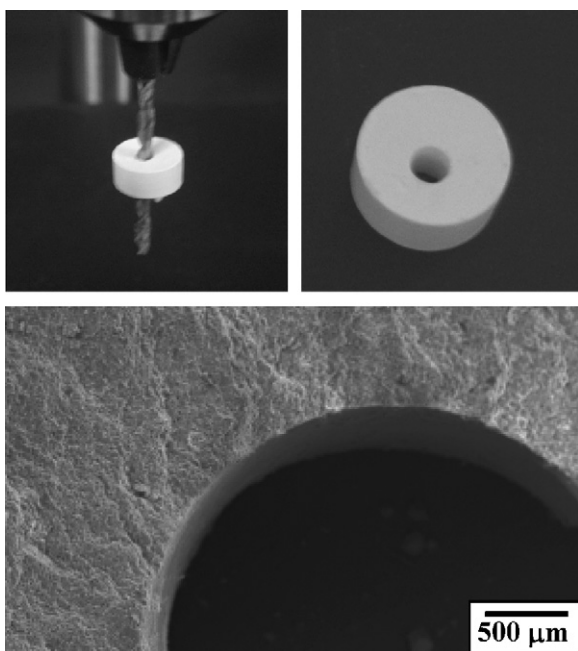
Photograph of the drilling test and the surface of drilled hole.
